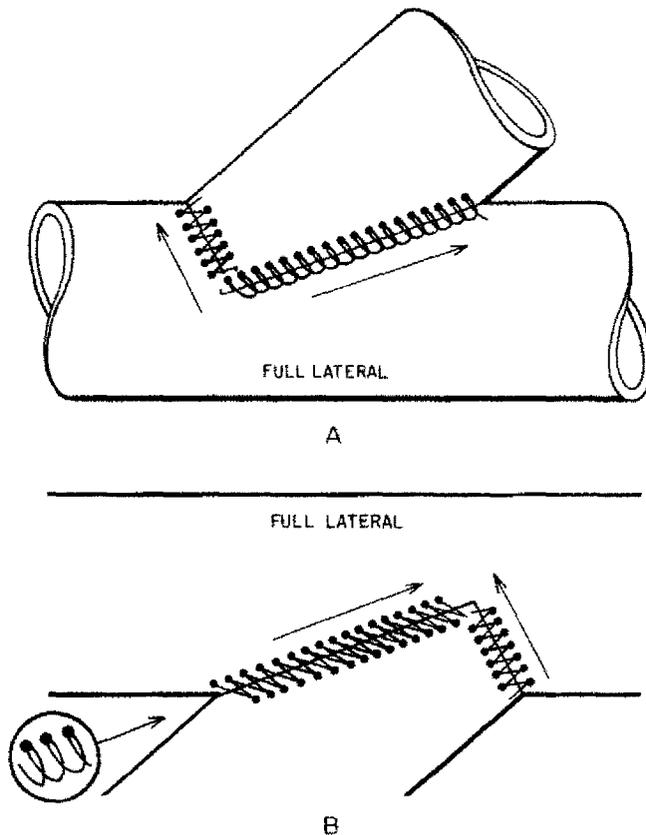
Weave patterns used to weld a lateral pipe joint. A. With intersecting pipe on top of horizontal pipe; B. With both pipes in a horizontal position.
